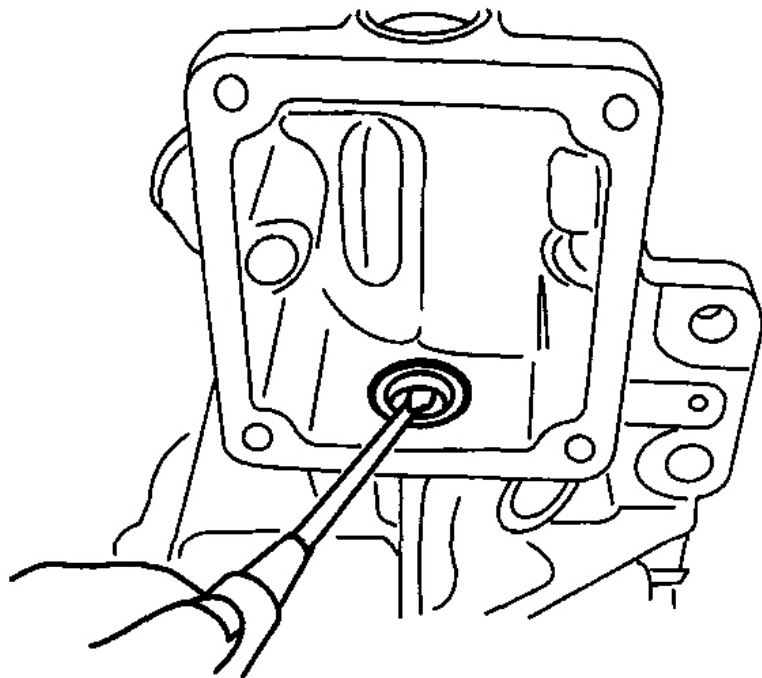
Prying Open Seal At Projection On Case Using Flathead Screwdriver & Removing Extension Housing
